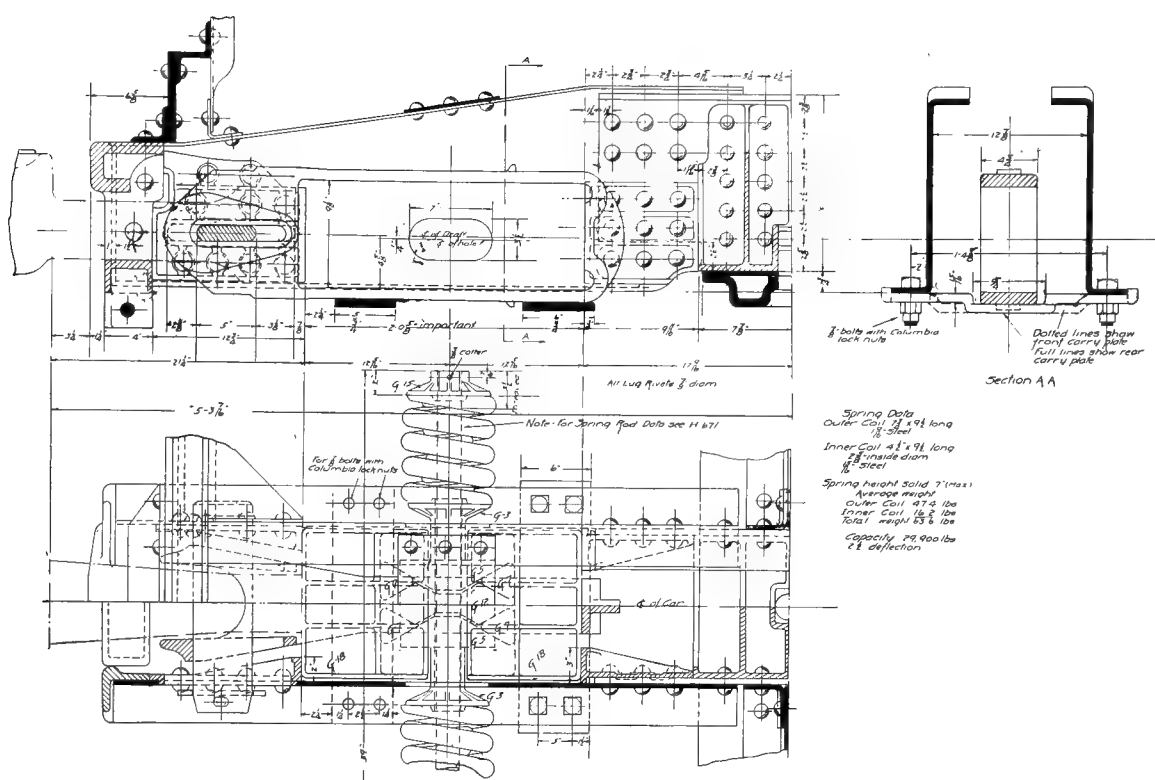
Cardwell Friction Draft Gear, Type G, Class 18, for New York Central Hopper Cars. Union Draft Gear Company.
